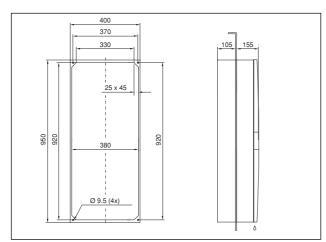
SK 3304.xxx/SK 3305.xxx partial internal mounting
